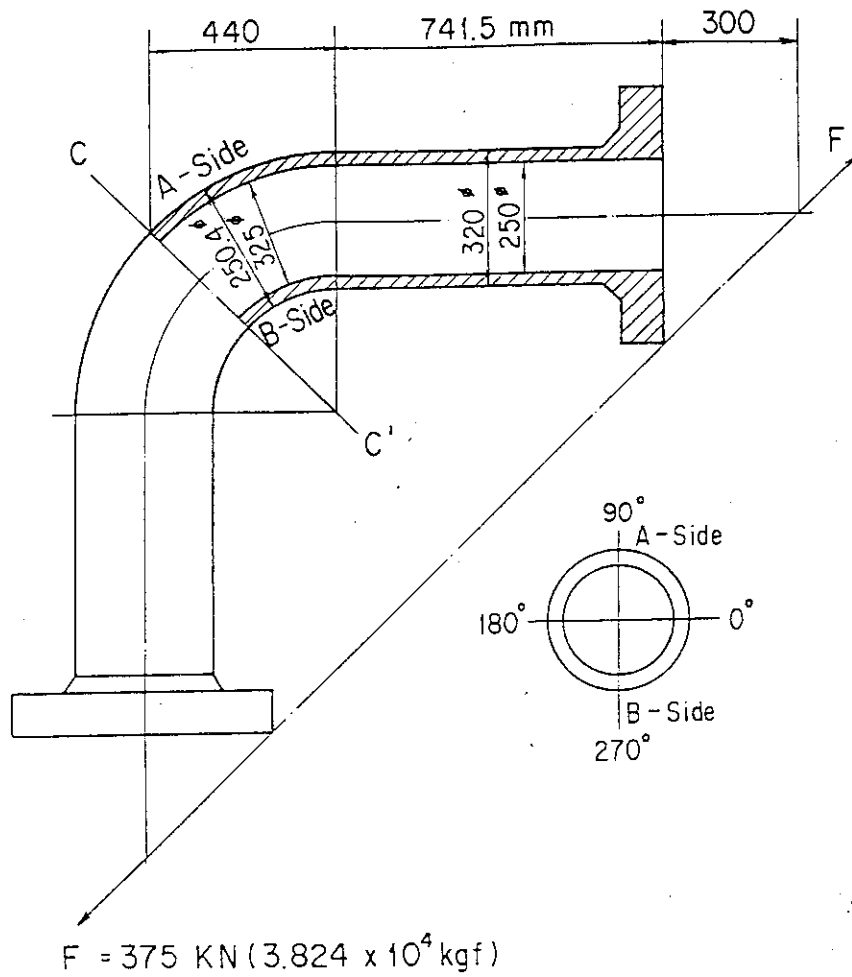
Bend Pipe with Two Ellipse-Shaped Cracks
